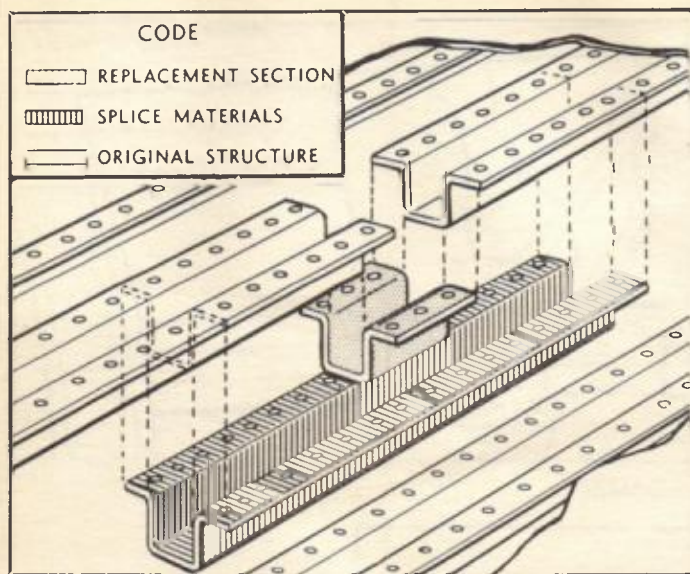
Fuselage Floor Panel Repair — Corrugated Reinforcement
